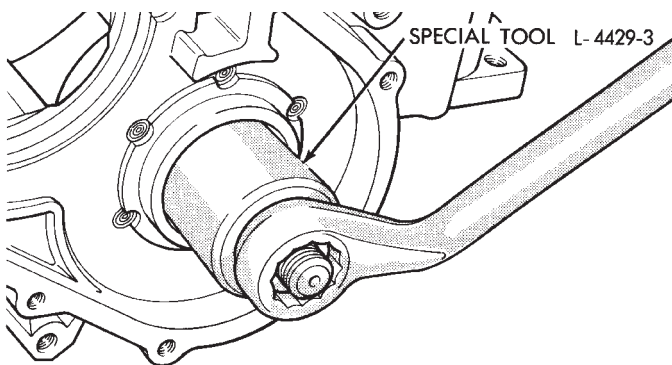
Install Rear Planetary Annulus Gear Bearing Cup
